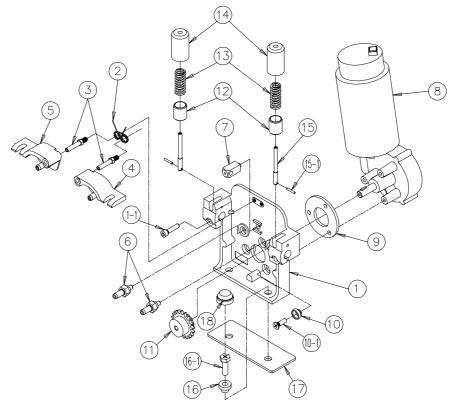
Exploded diagram of wire feeding unit (U5281B00)
